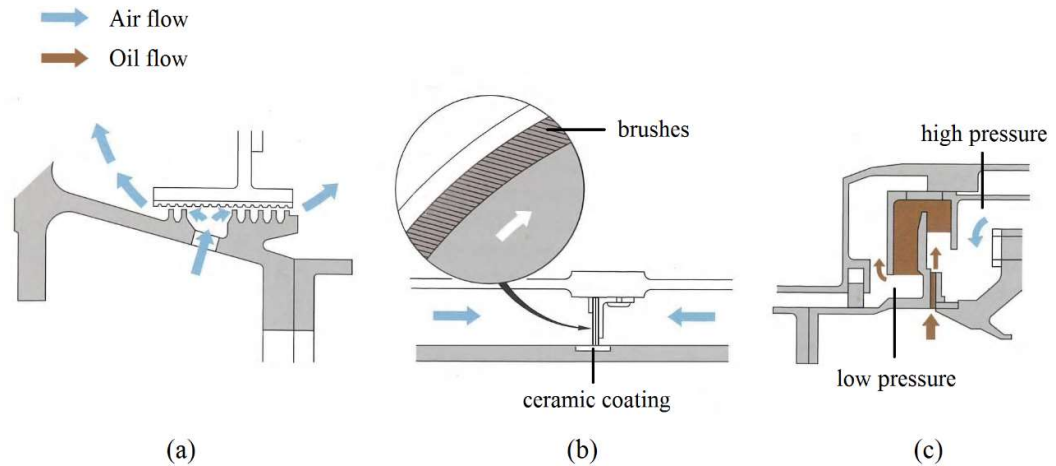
Three rotating seals used in secondary air systems: (a) labyrinth seal, (b) brush seal, (c) hydraulic seal. Adapted from Rolls-Royce (2005)
